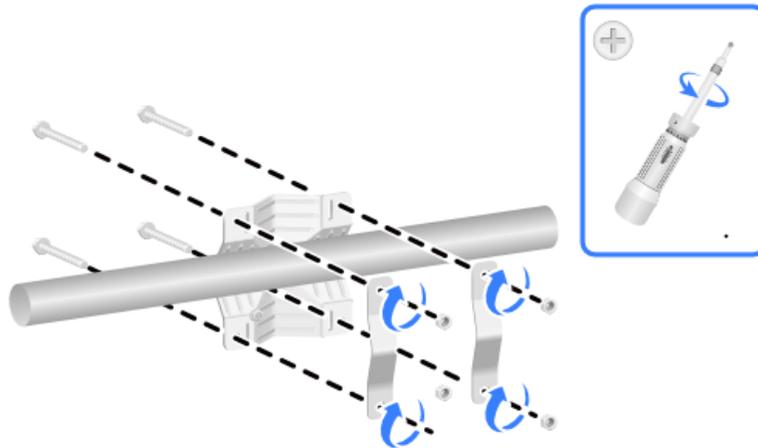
Secure Mounting Bracket and Bracket Clamp
